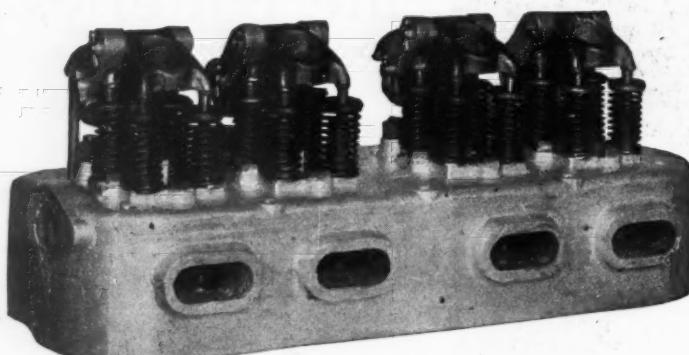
Roof overhead-valve cylinder head for Ford cars
